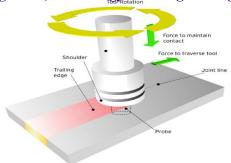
Schematic diagram of Friction Stir Welding
